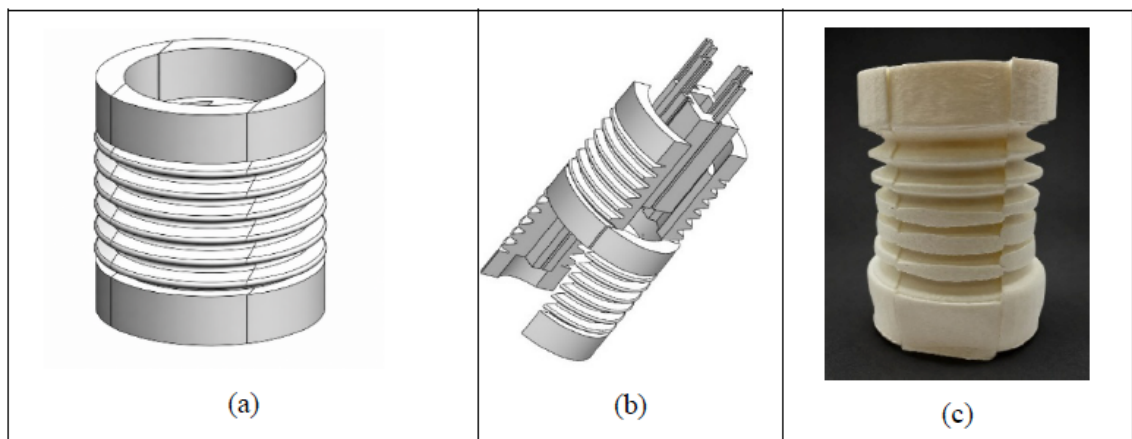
Soft actuator heat-shrink mold: (a) complete mold assembly, (b) disassembled mold parts (c) mold after heat exposure.
